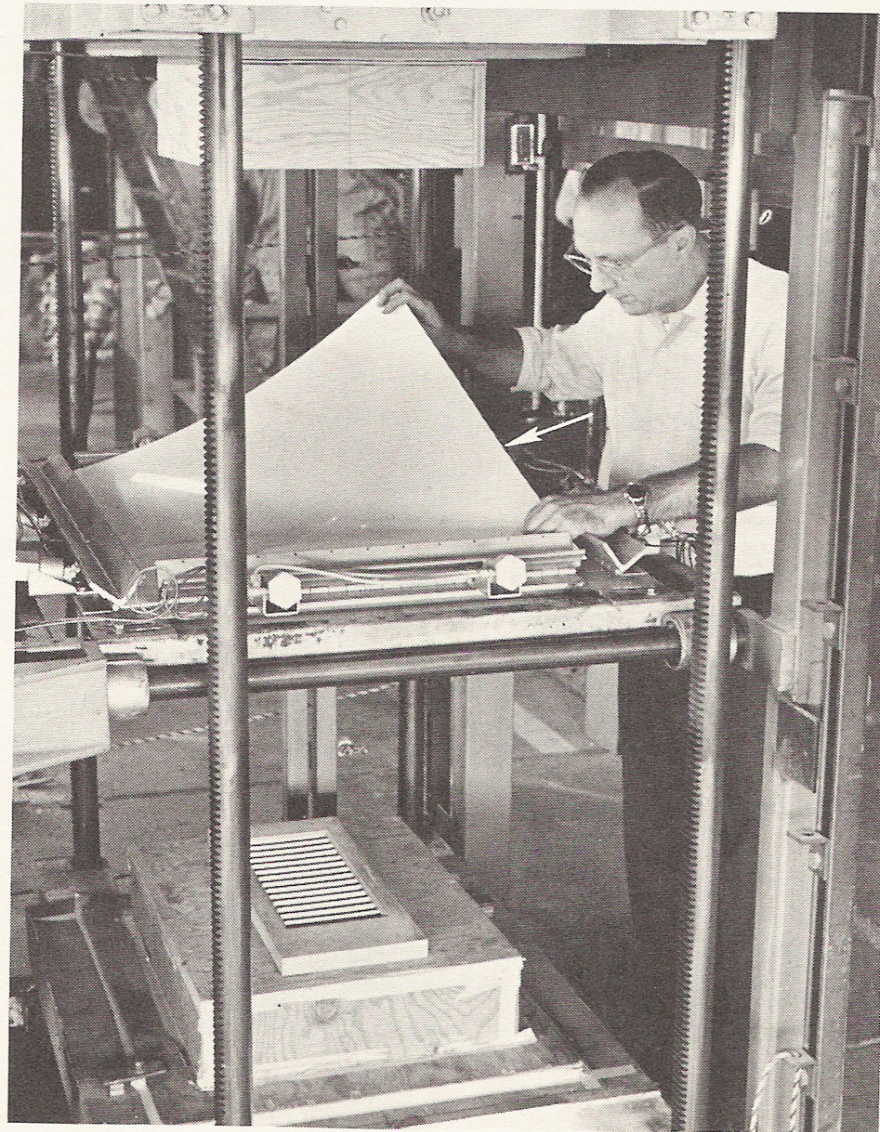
Plastic sheet is located in the clamping frame ready for heating. The lowered male mold is shown at the bottom. (The B.F. Goodrich Co.)
